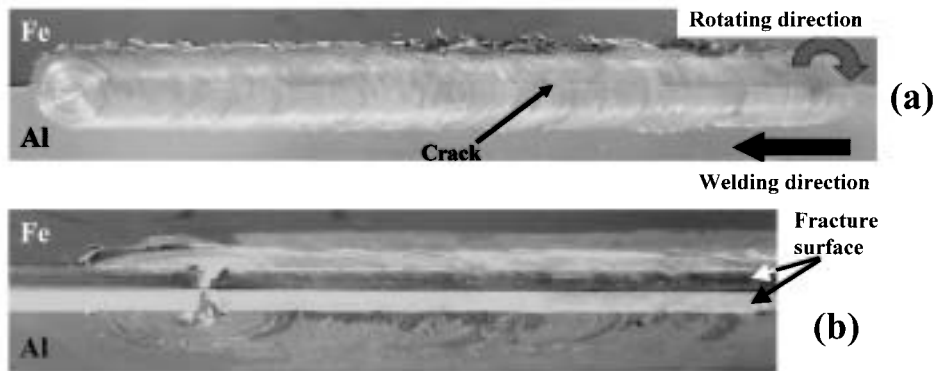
Surface view and fracture surface of the weld when the welding direction was reversed, that is, the pin rotation direction was counterclockwise.
